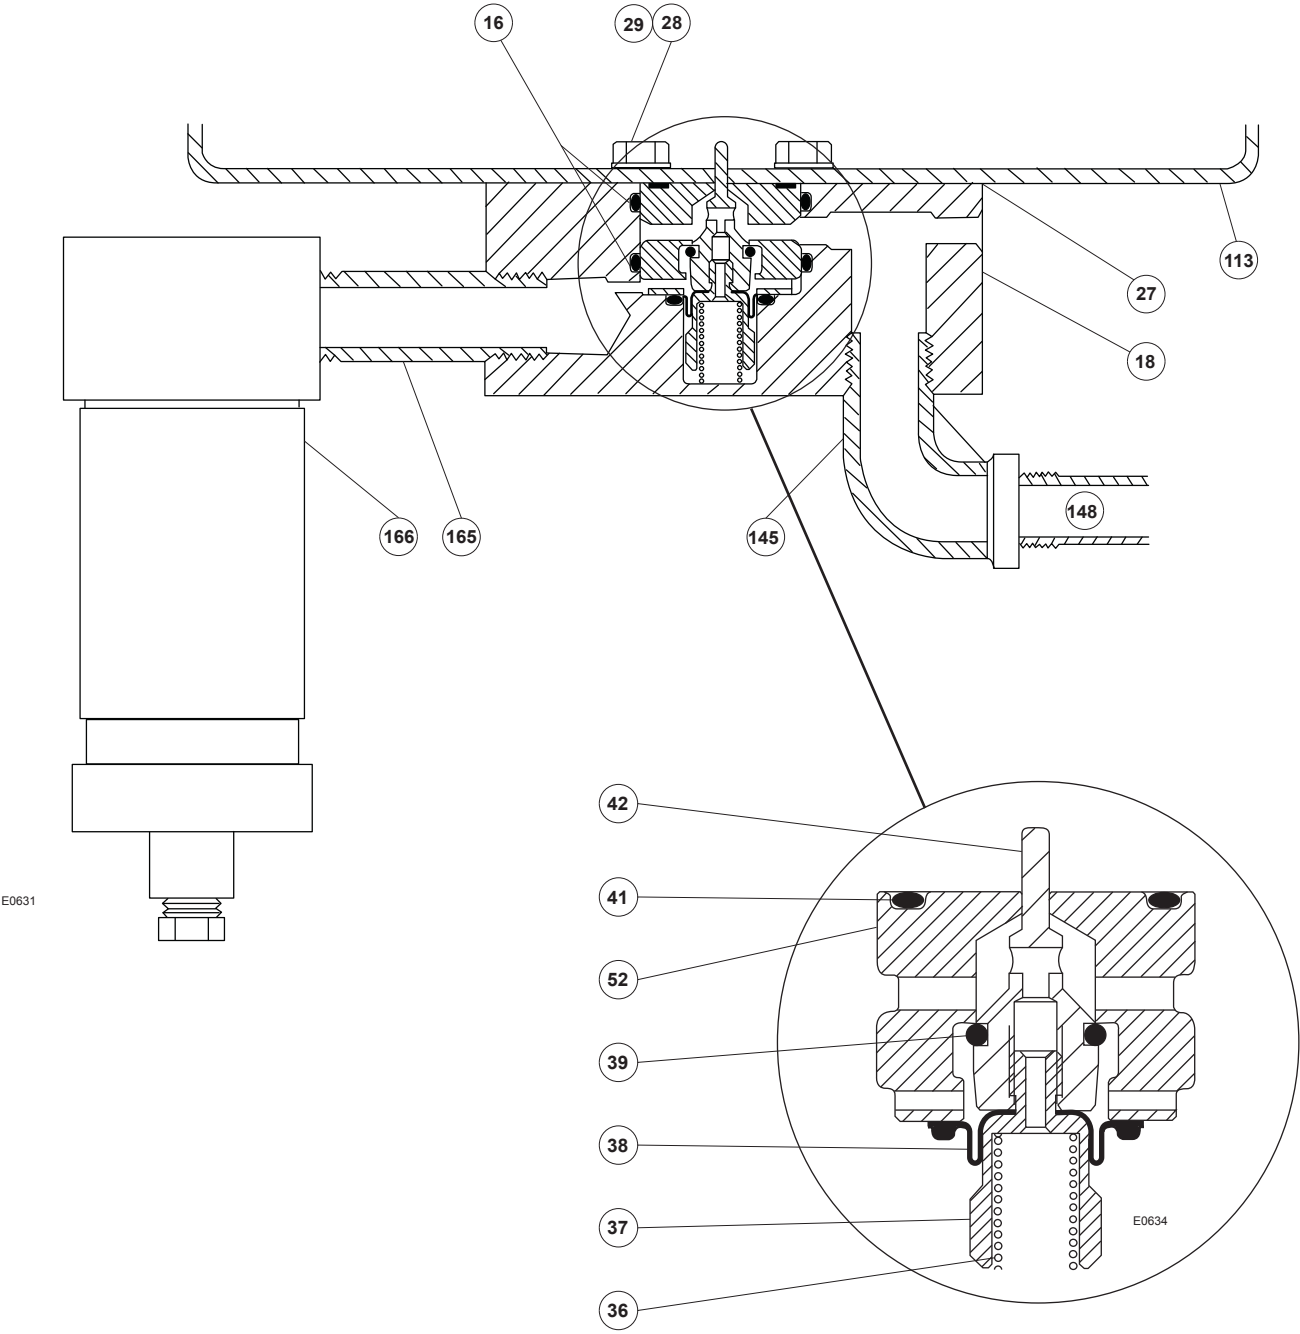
Type ACE97 DN 15 / NPS 1/2 Pad Valve
